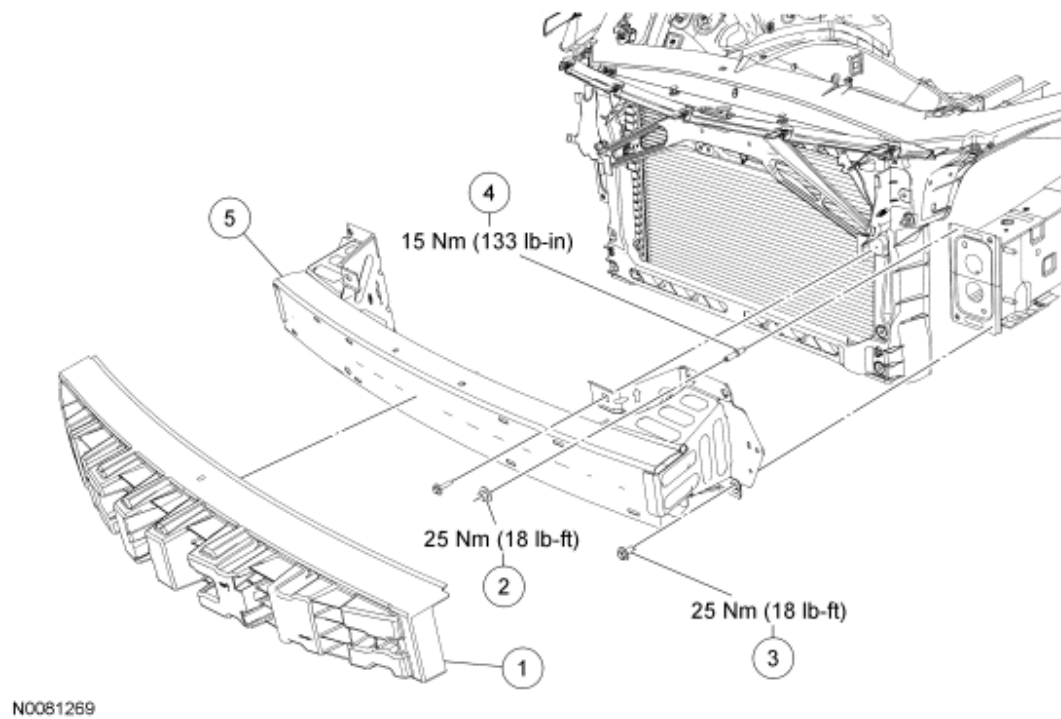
Exploded View Of Front Bumper With Torque Specifications
